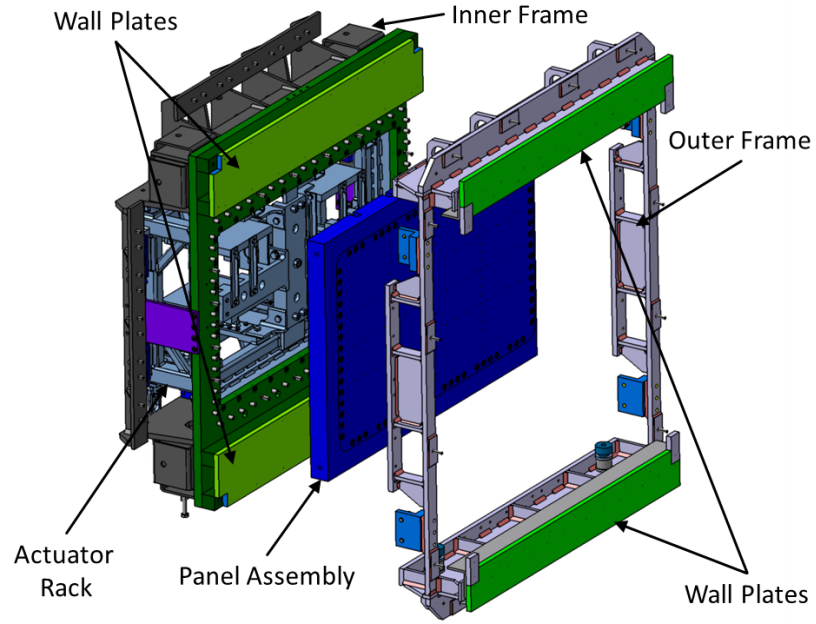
Test Setup divided in its outer frame, the panel assembly and the inner frame with applied actuator rack.
